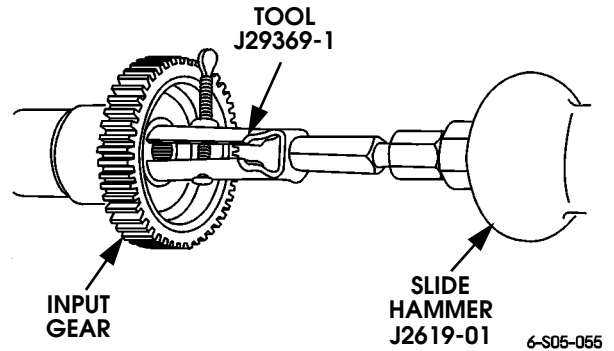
Removing Mainshaft Pilot Bearing From Input Gear
